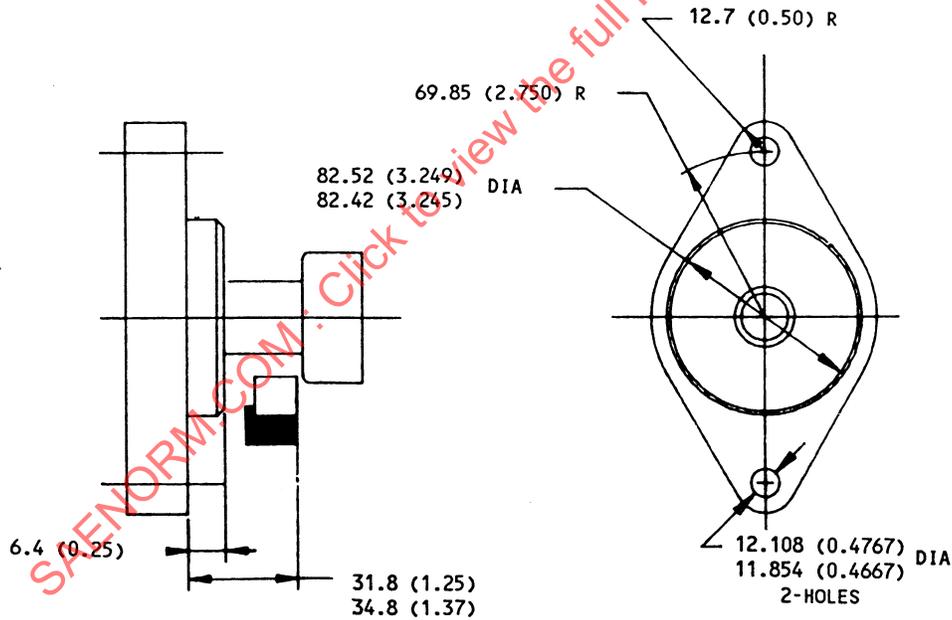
TYPE NO. 5 MOUNTING FLANGE LIGHT DUTY
